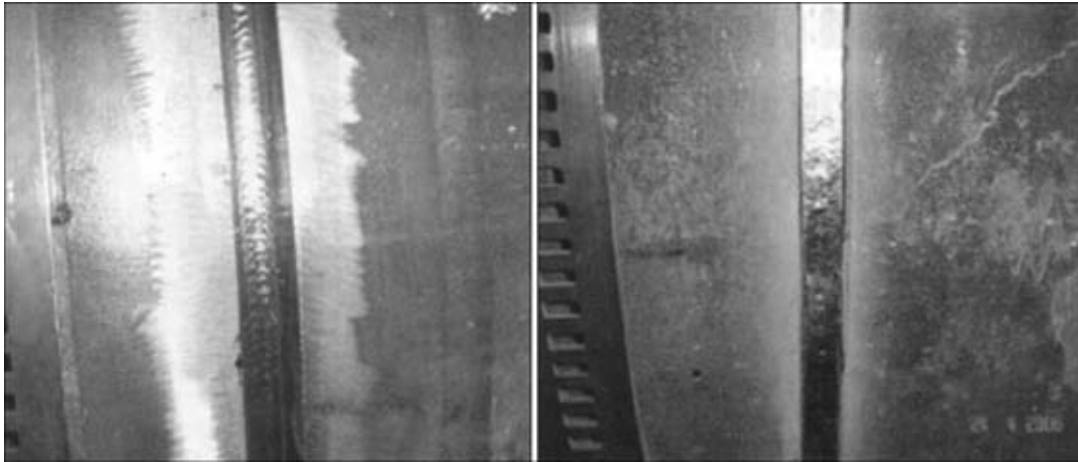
Appearance of welded joint produced using MIG/MAG process
